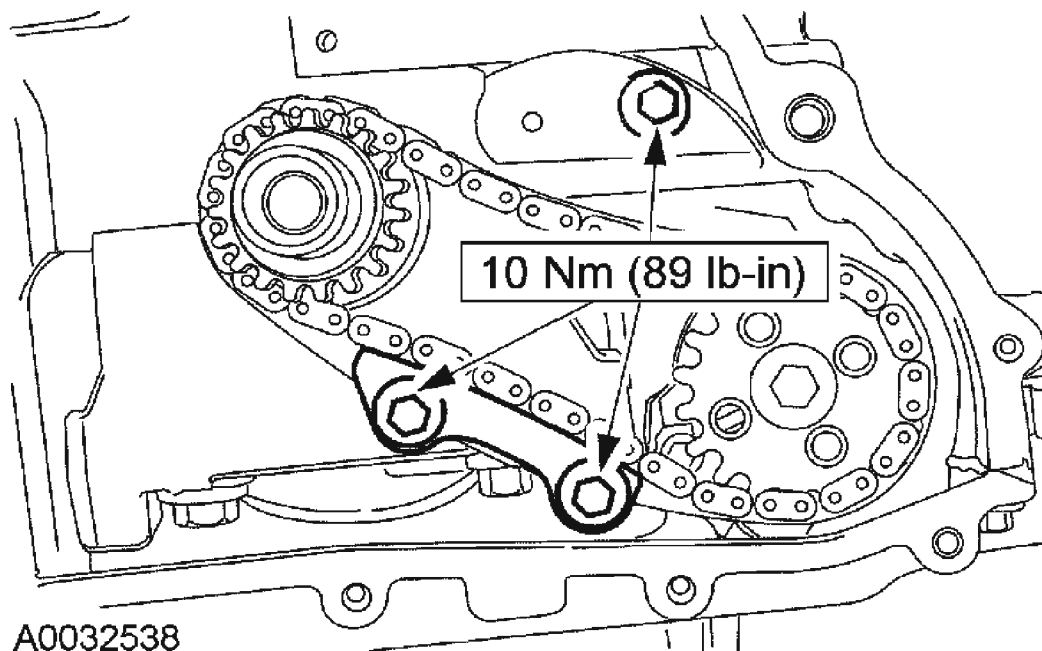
Installing Oil Pump Chain Guide And Shoulder Bolts
